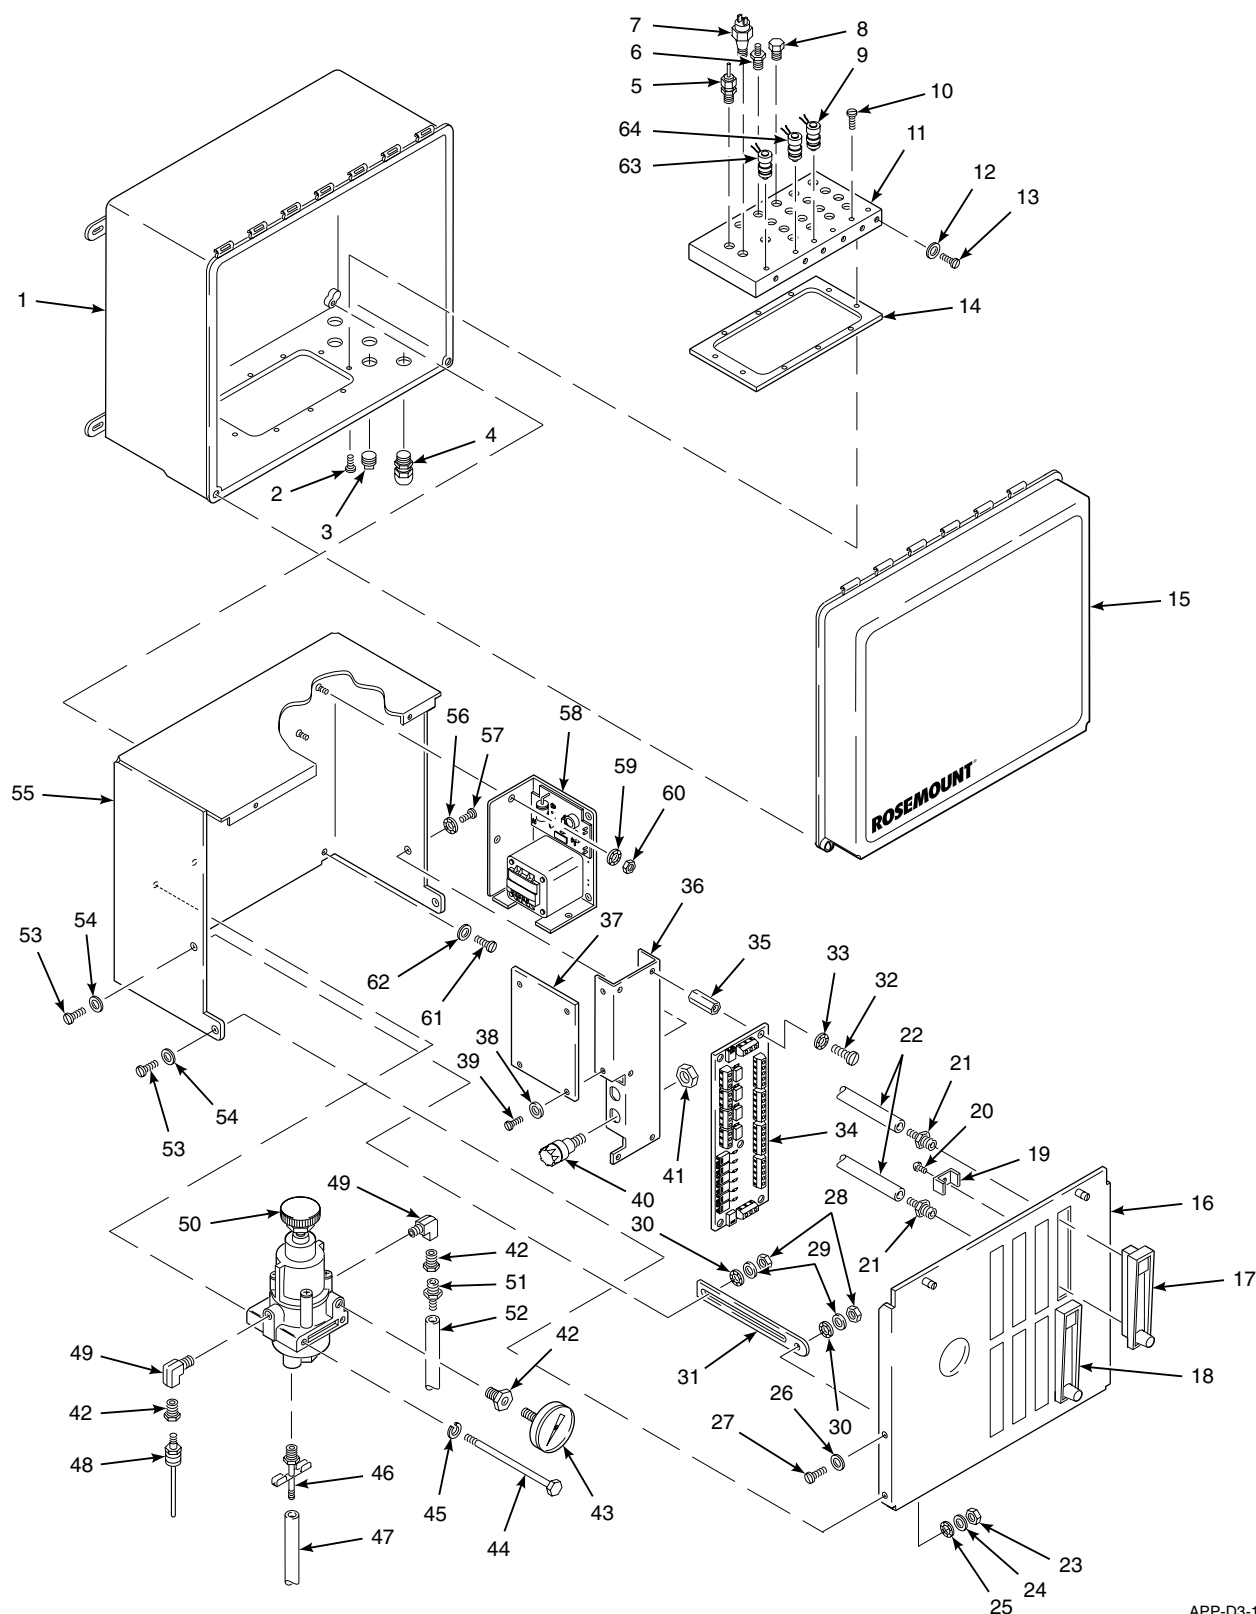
Multiprobe Test Gas Sequencer, Exploded View
